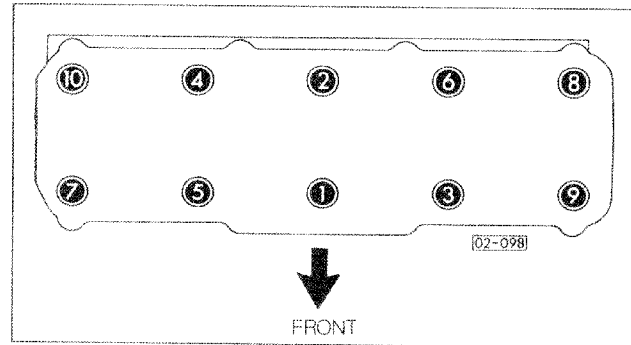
Cylinder head bolt tightening sequence. 8-valve engine shown. 16-valve sequence is the same.
